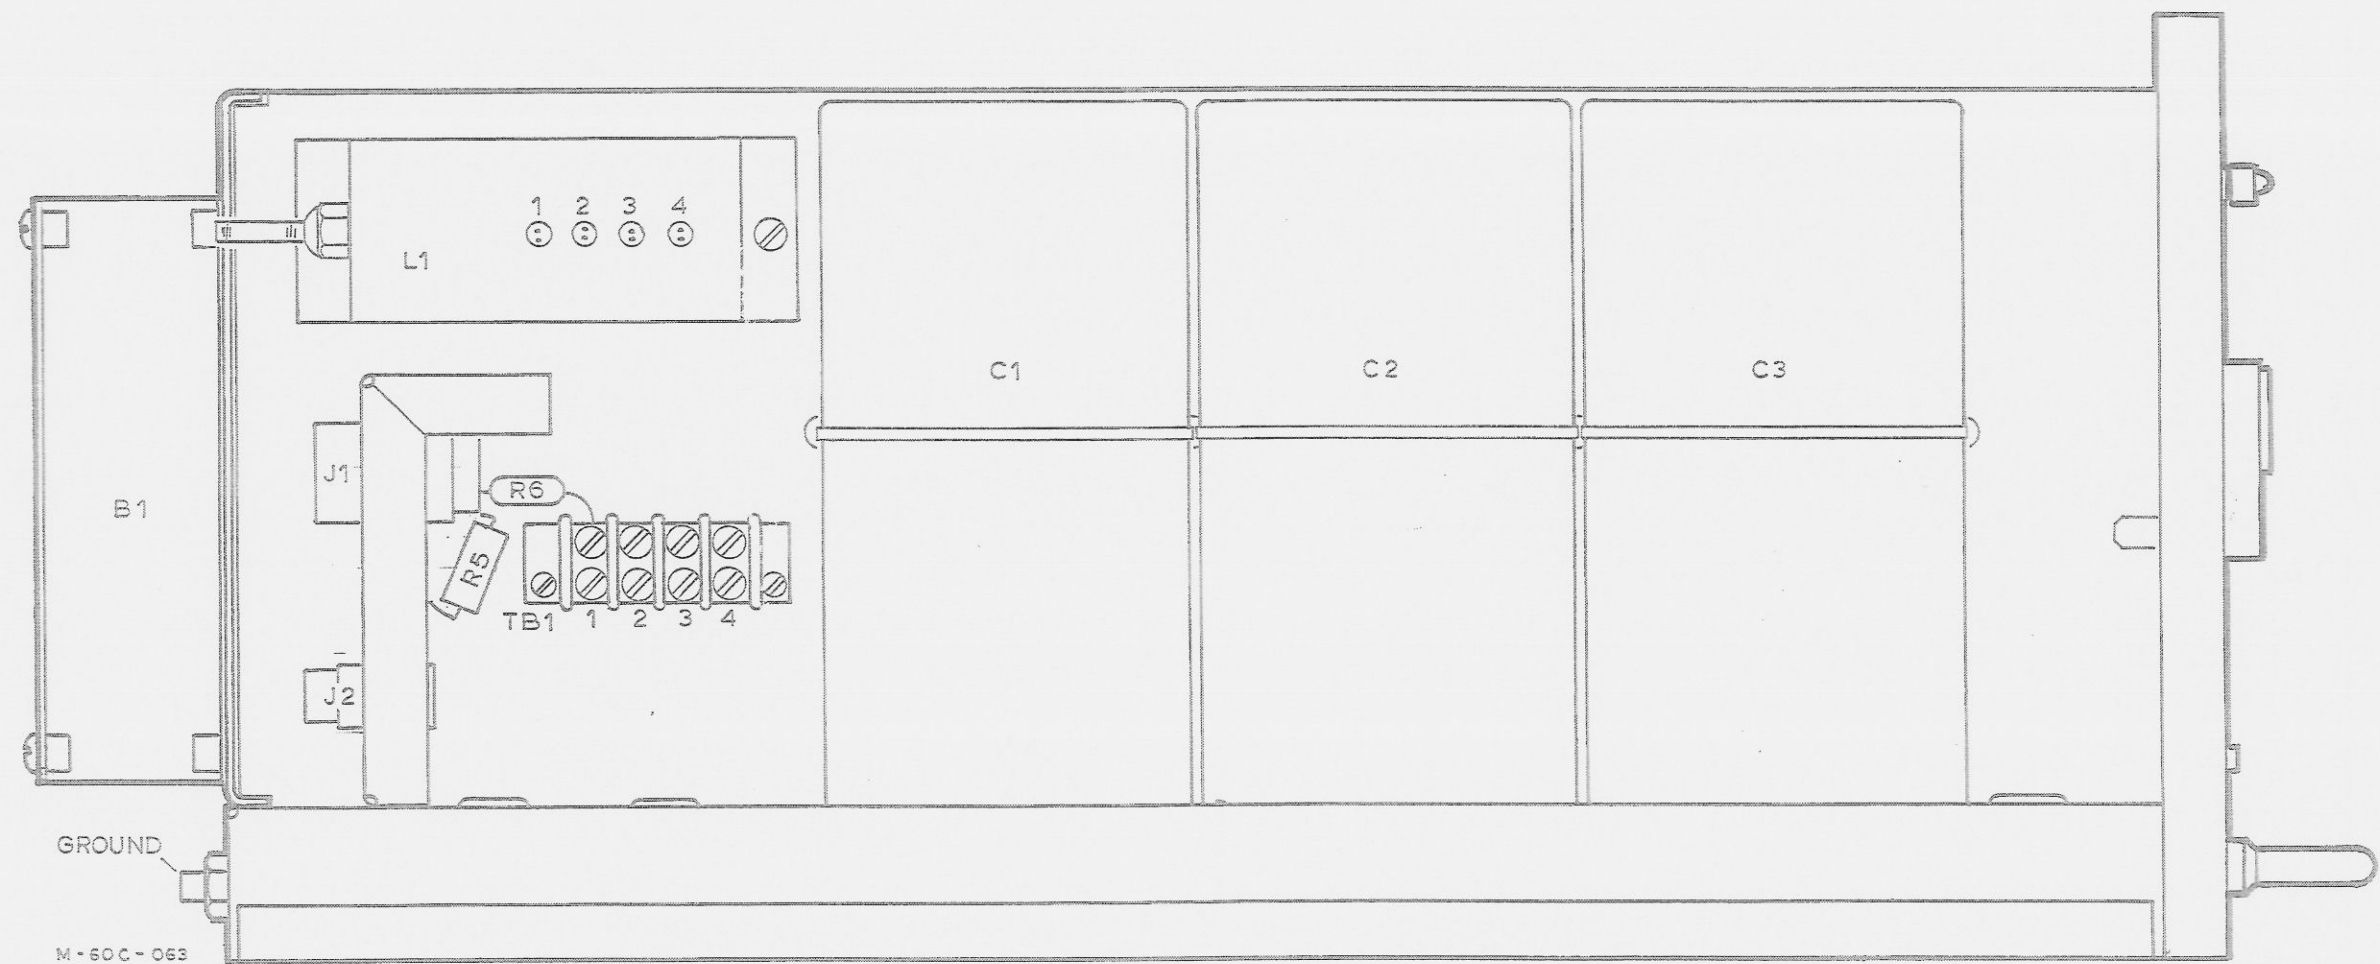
Assembly Detail - NAP10/1 1.25 kW AM Power Subsystem Module (Side View)
